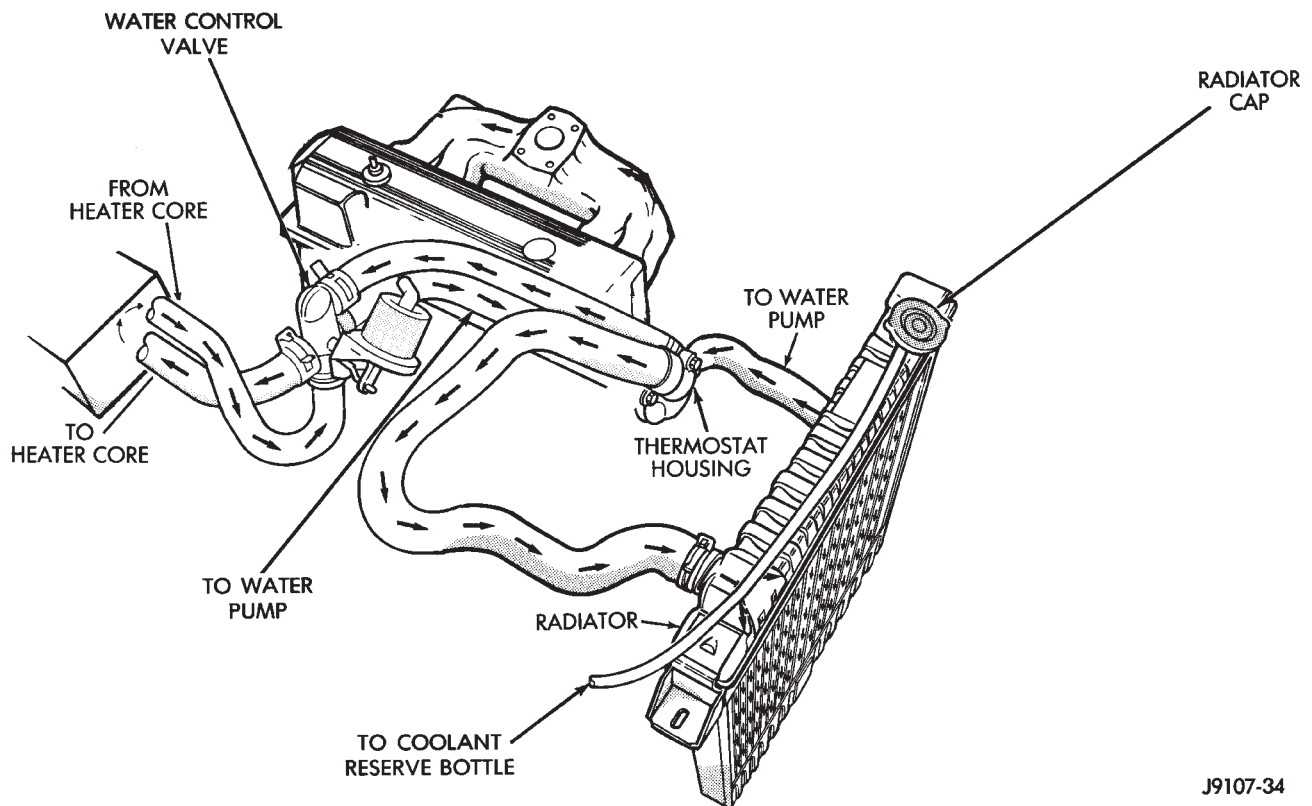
Coolant Flow—XJ Models with 2.5L 4-Cylinder Engine—Typical
